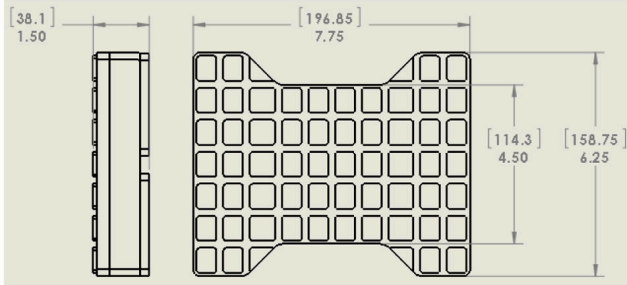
Dimensions of the Safe-T-Tile® in inches and [millimeters]
